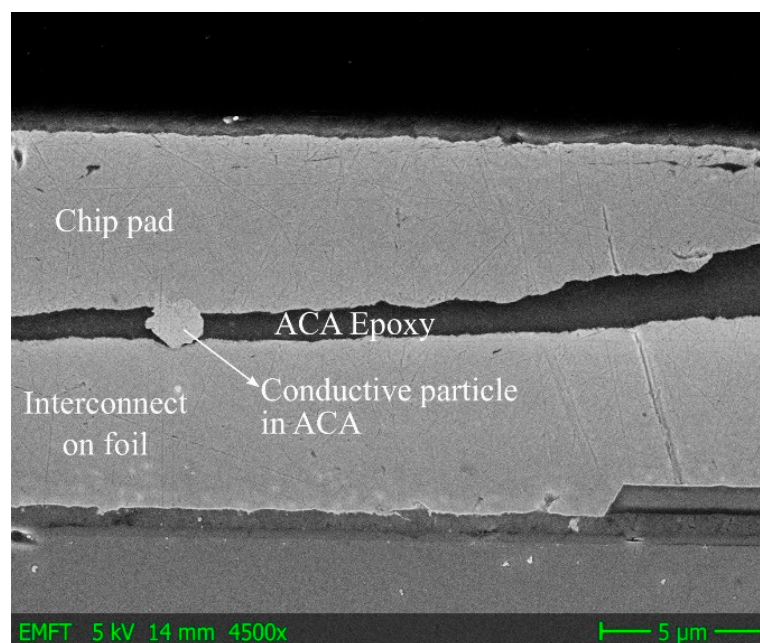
Scanning electron microscopy image of a typical example of the cross-section of a single contact pad interconnection of a flip-chip bonded chip-foil package.
